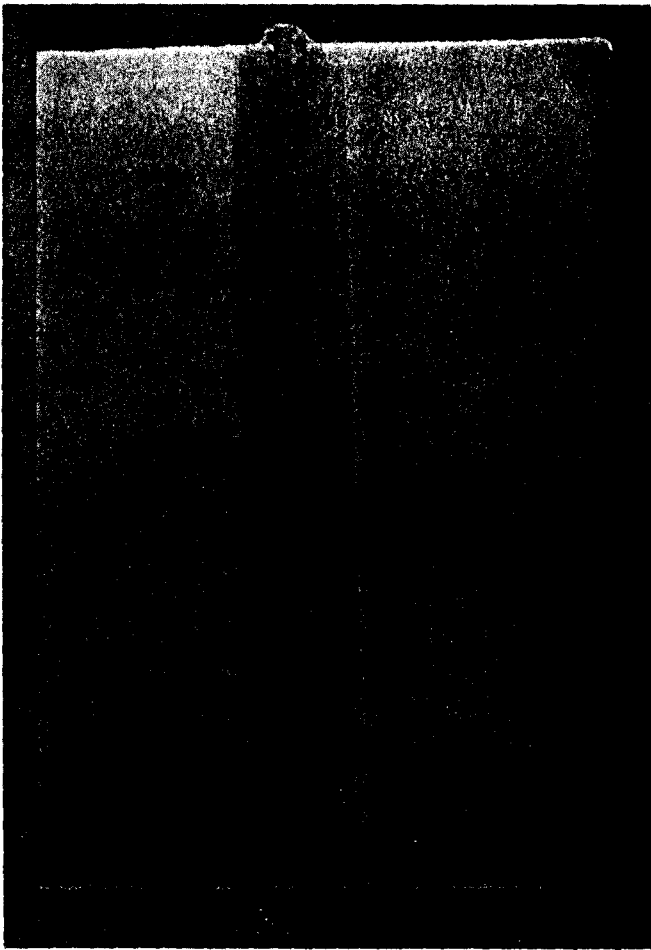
Single-Pass Electron Beam Weld in a 4 in. Thick Carbon Steel Section
